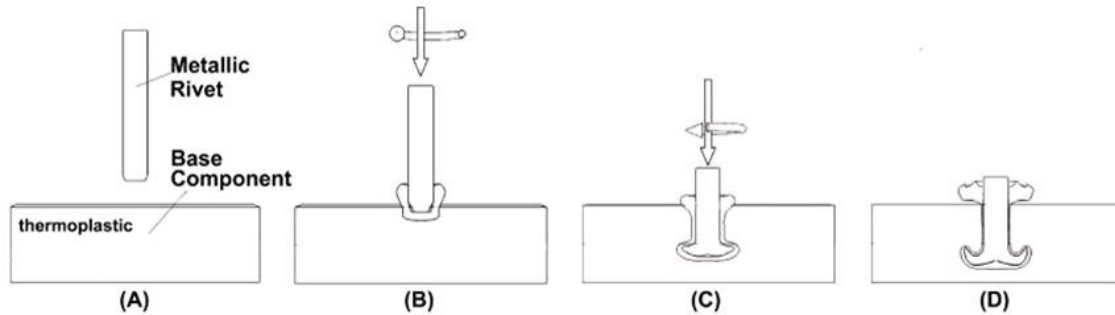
Schematic view of the FricRiveting process in metallic-insert joints. (A) Positioning of the joining partners, (B) Feeding of the rivet into the polymer (Friction), (C) Rivet forging, (D) Joint consolidation.
